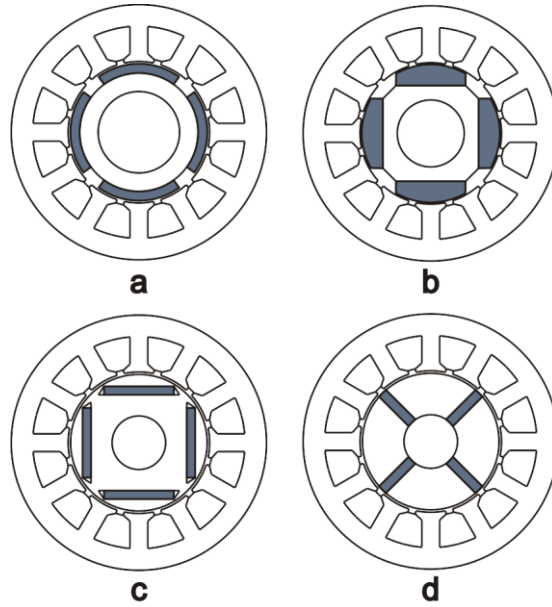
Possible rotor designs for PMBL inside-rotor motors [9, 10].
